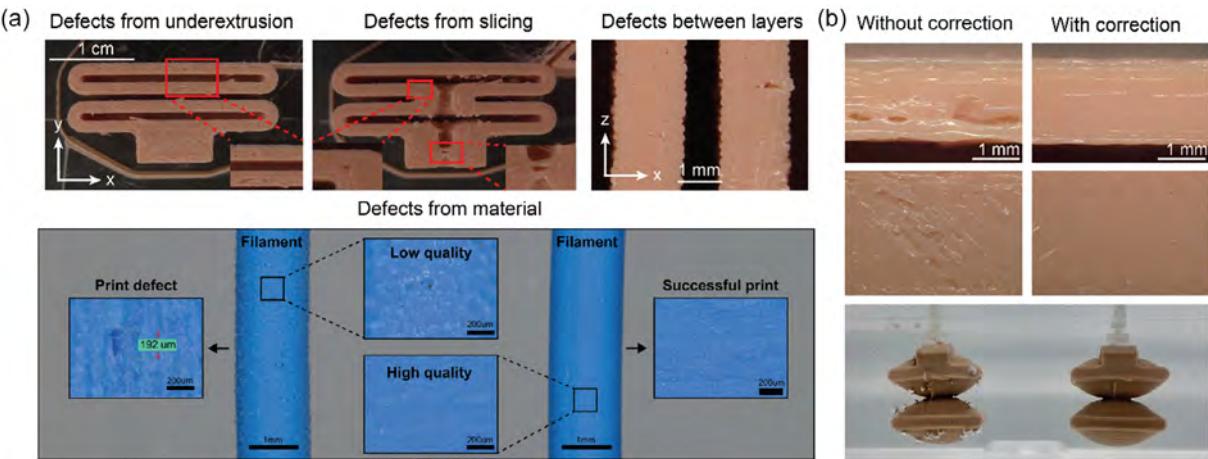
Examples of print defects and their impact on soft robotic components using FDM printing. a) Examples of common defects in the AM of soft robots. Macroscopic and microscopic views show print defects from various sources, often caused by material quality issues or suboptimal print parameters and b) Microscopic view of the influence of correction on the soft actuator and leakage test comparing actuators fabricated with and without defects.
